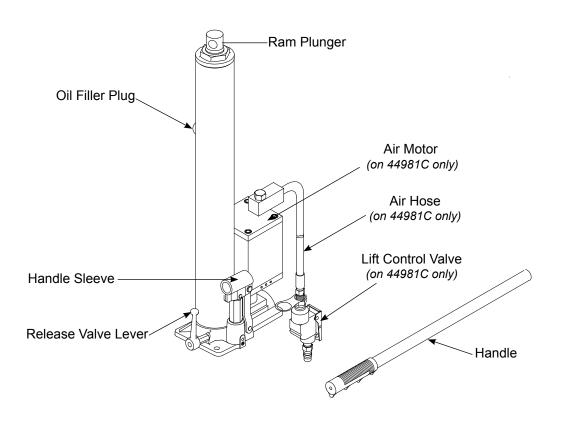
Typical Hydraulic Long Jack Nomenclature (44981C shown)
